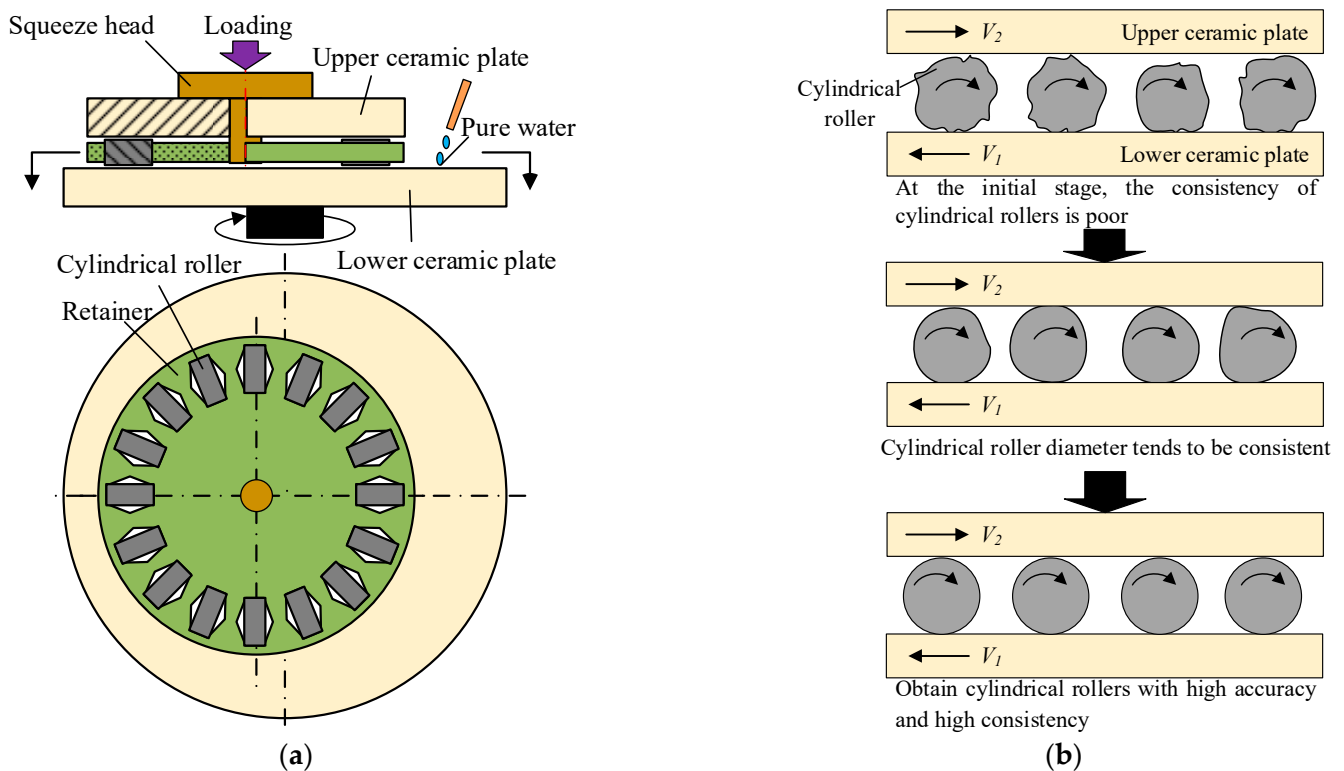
Both-sides cylindrical roller machining method based on hard ceramic plate: (a) Structure diagram of machining device; (b) Schematic diagram of machining principle.
